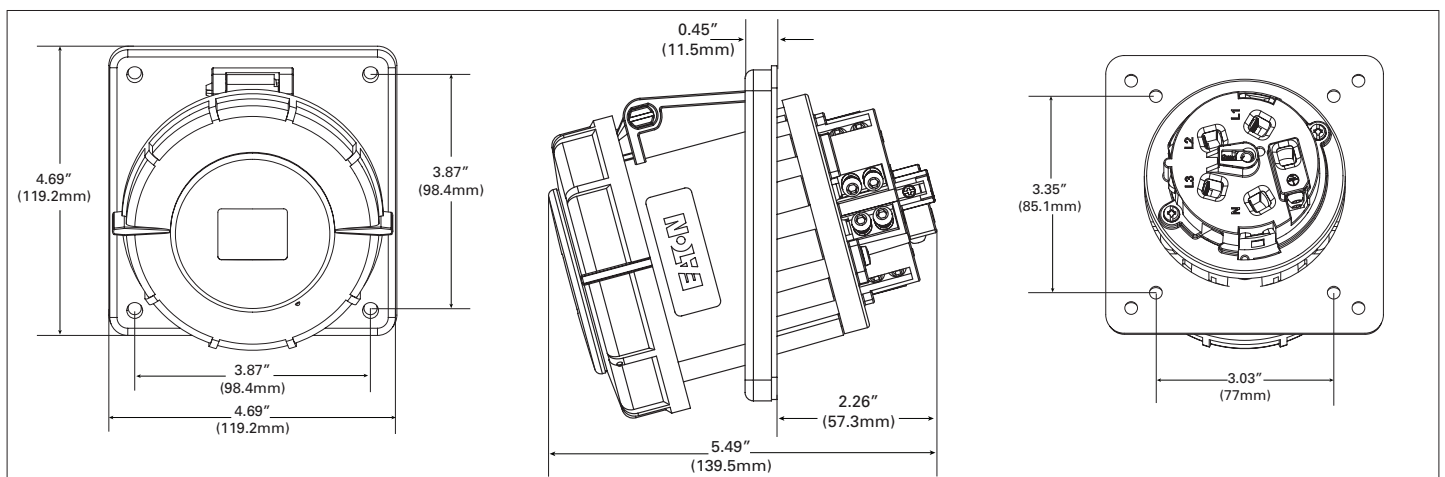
60A Angled Receptacles, Front, Side & Back Views
